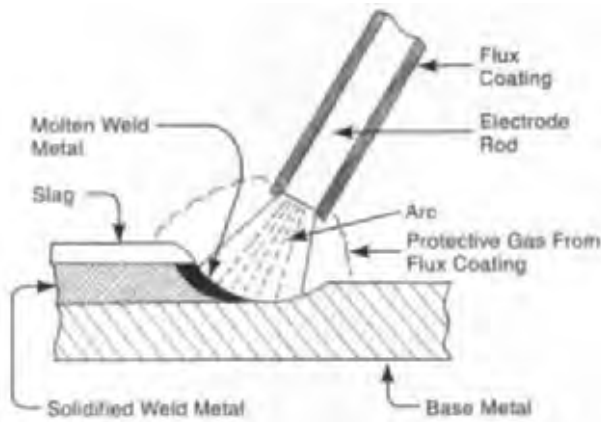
C1a Shielded metal arc or "stick" welding (SMAW).
